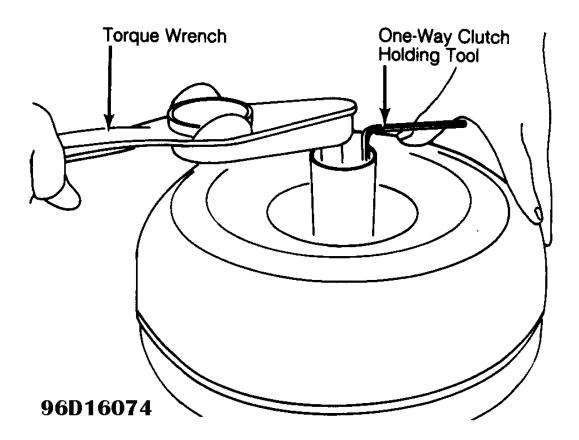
Stator One-Way Clutch Check Courtesy of FORD MOTOR CO.
